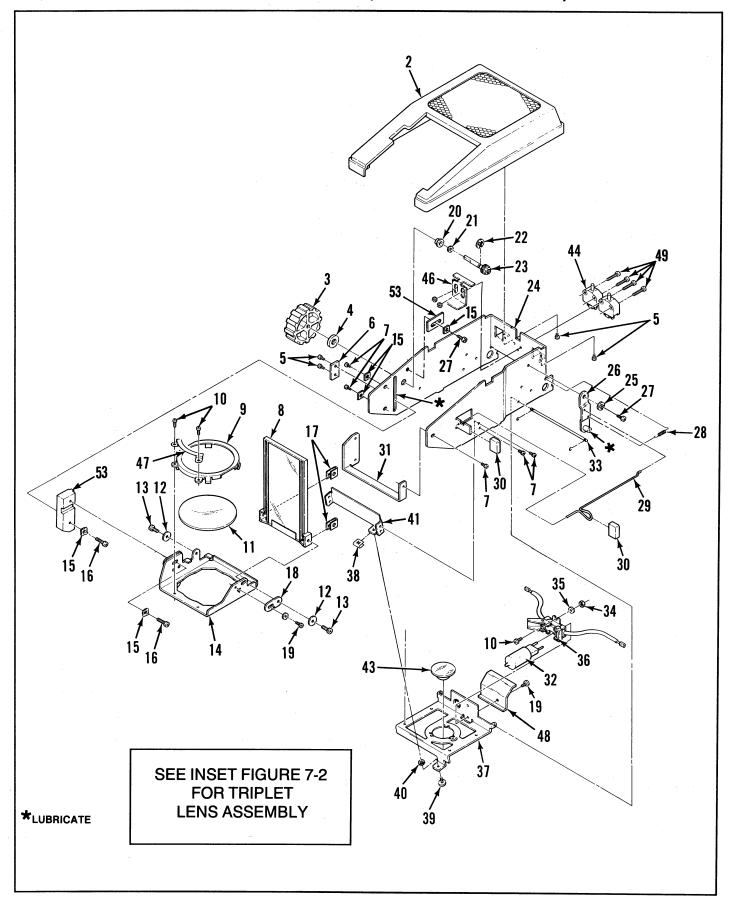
HEAD ASSEMBLY (FOR FSX/FSY LAMP MODELS)
